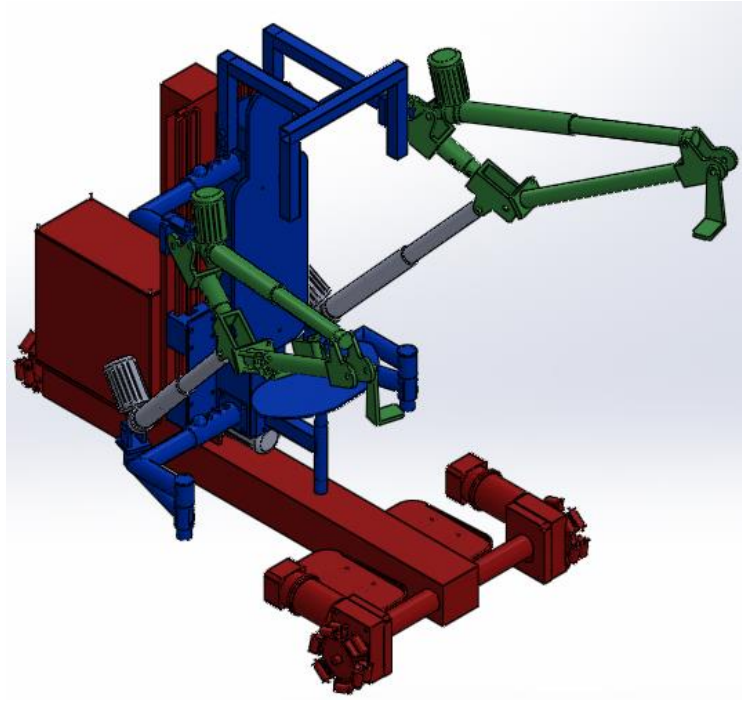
Isometric view. Chest, arms and lower body subassemblies.
